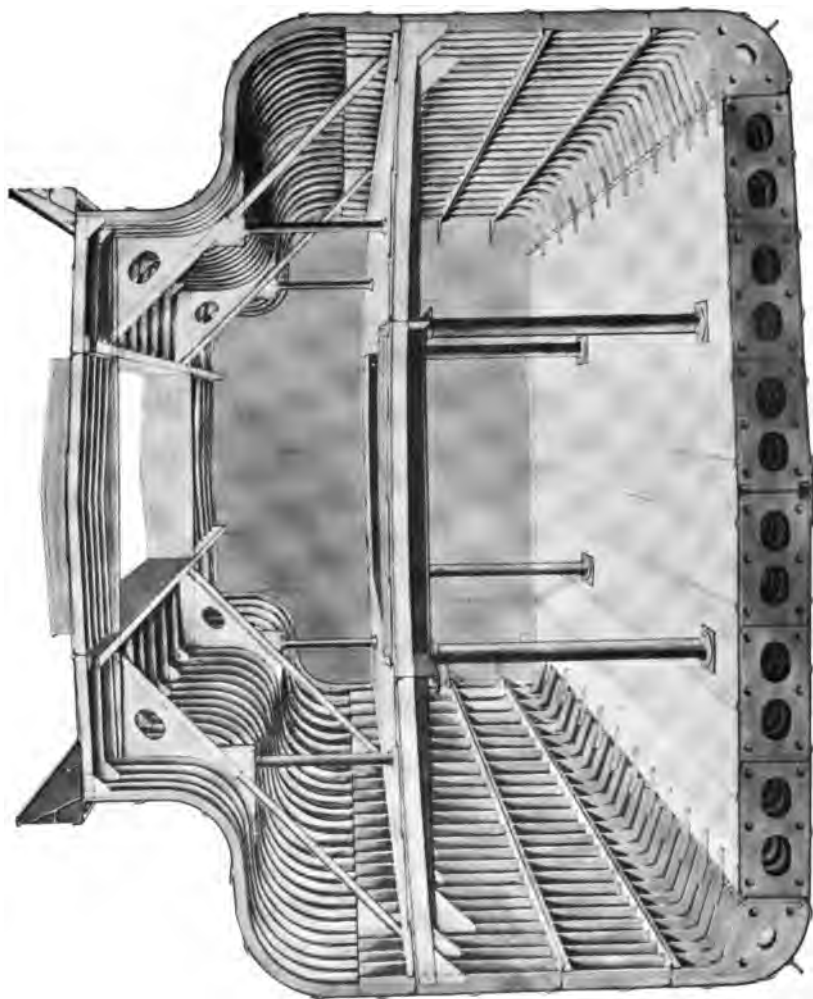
Hold View of a Turret Steamer. (Widely-spaced steel tube pillars.)
